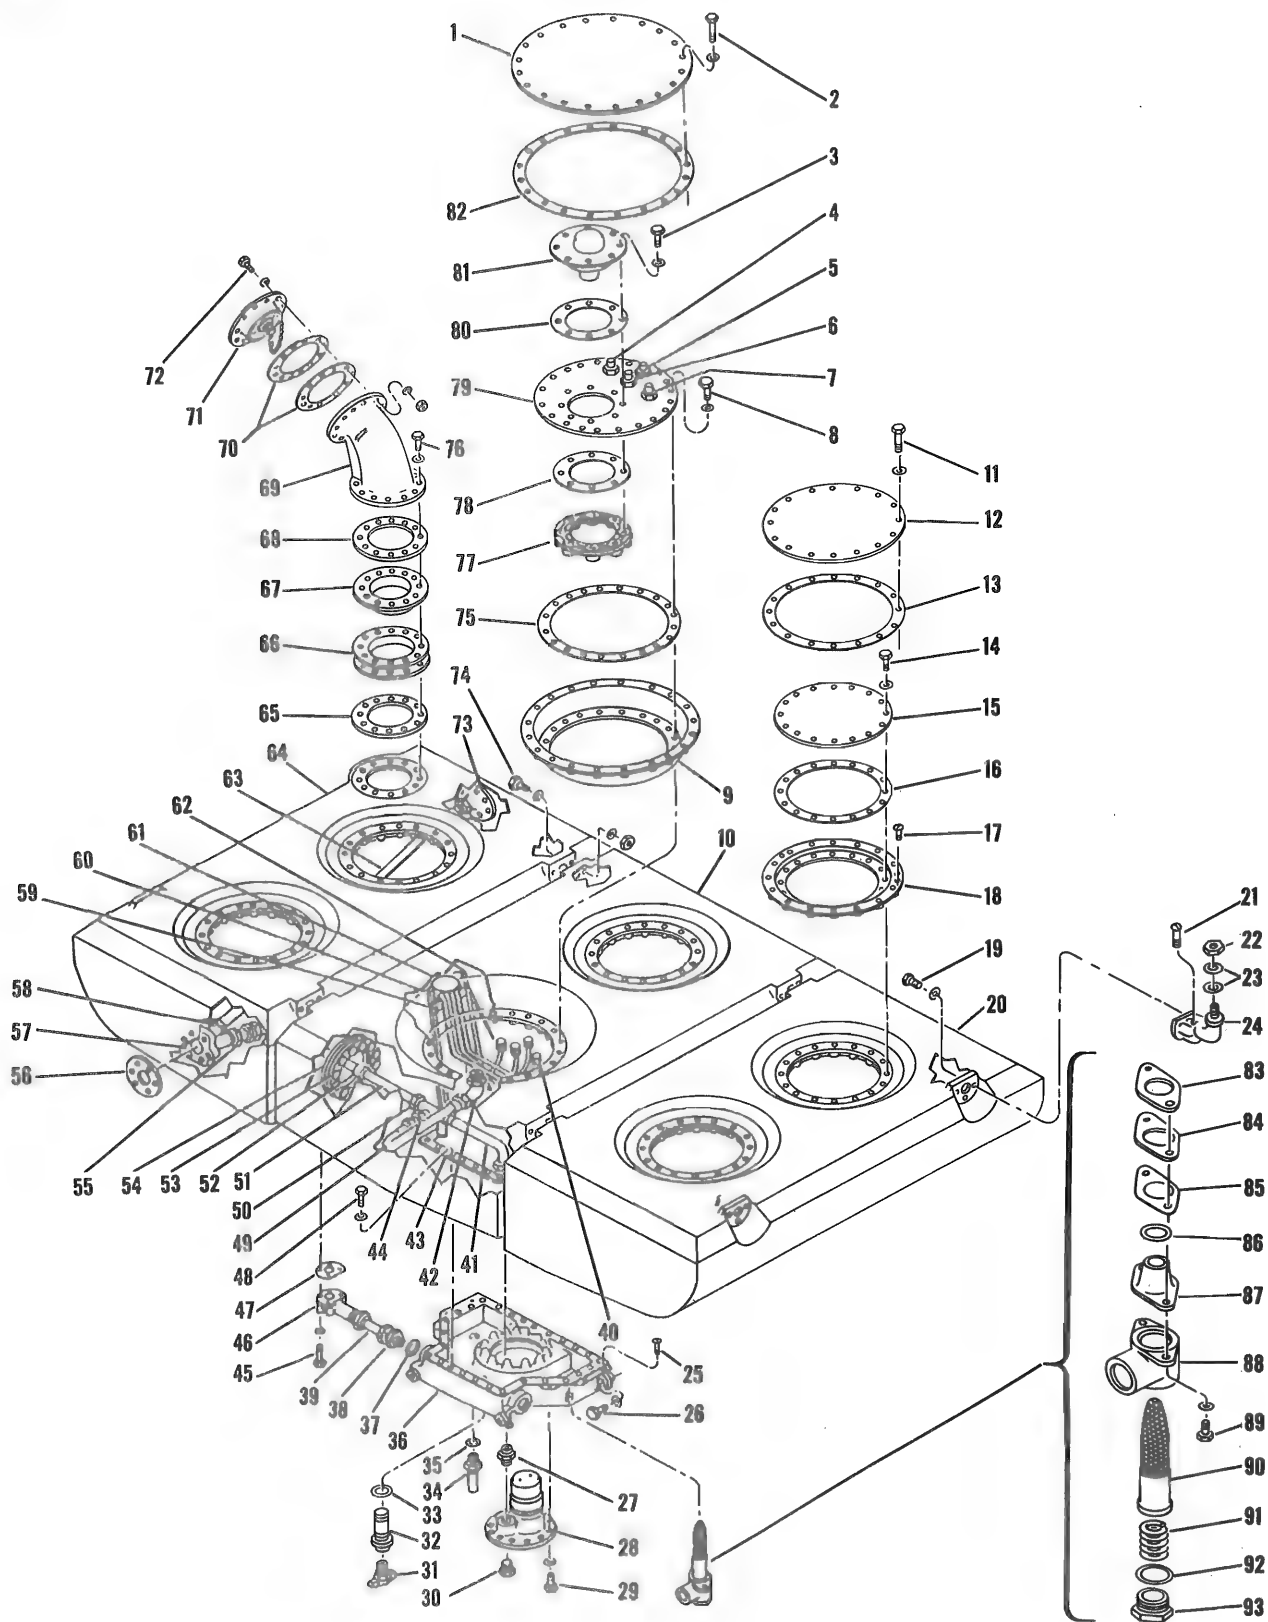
Center Fuel Tank (Sheet 1 of 2)
